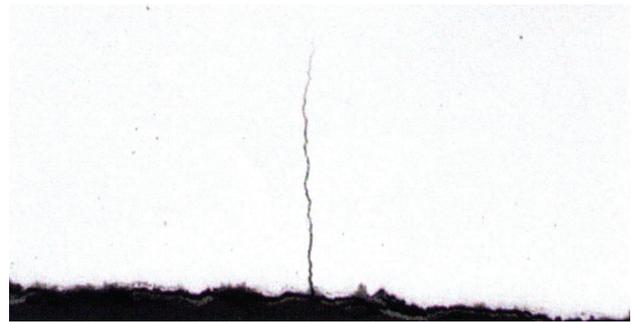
Crack near weld on the superheater-P2 collector metallurgical analysis
